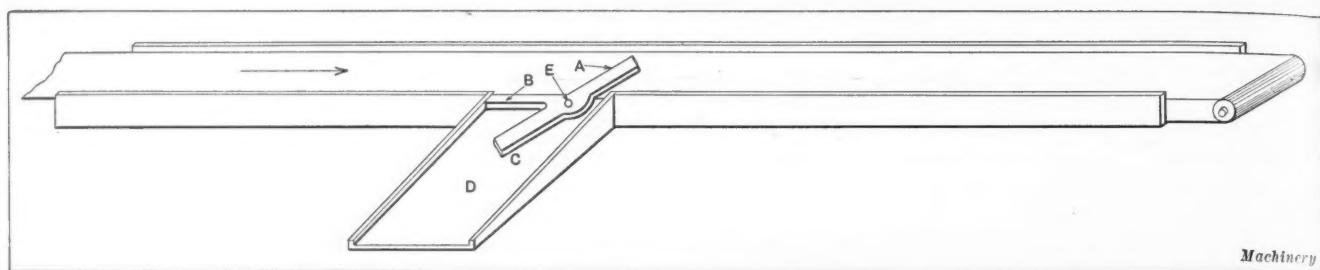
Diagram illustrating Principle of Mechanical Conveyor and Automatic Distributor used in Fuse-loading Plant
